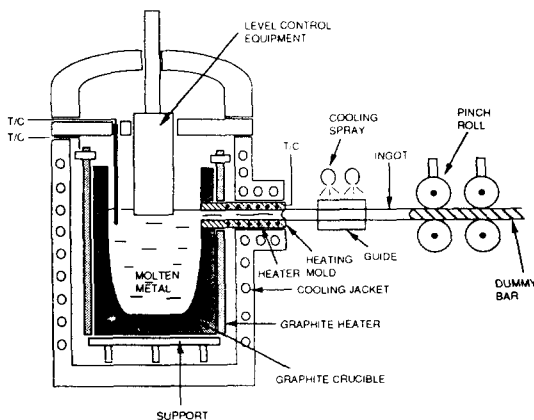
Horizontal continuous casting apparatus with the heated mold
